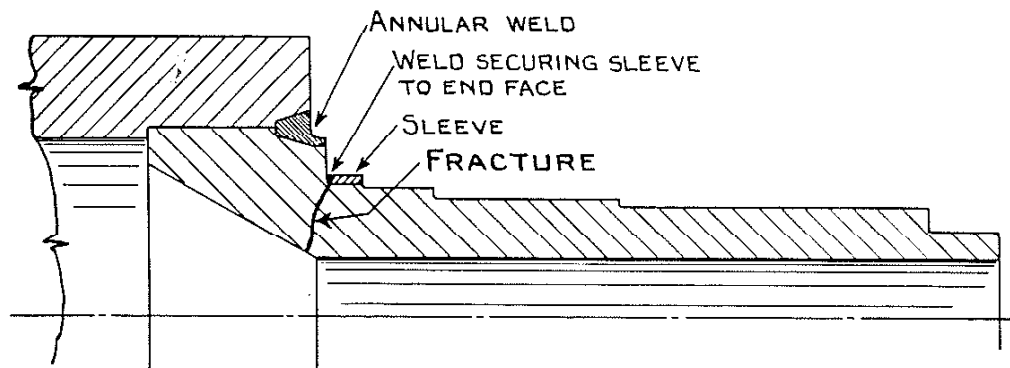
Failure of a Steam Heated Roll Caused by Welding on Repair Sleeve.
